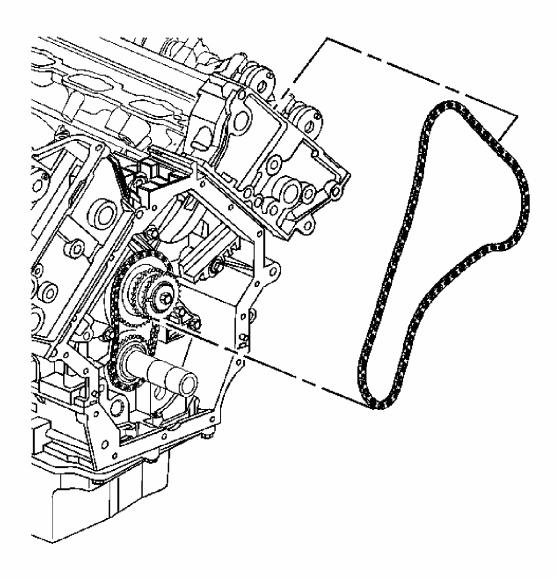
View of Left Secondary Camshaft Drive Chain Courtesy of GENERAL MOTORS CORP.
